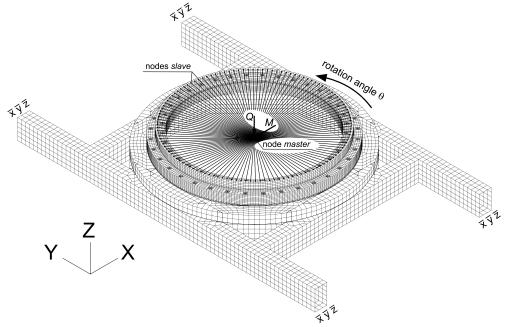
FEM model of the subassembly support and slewing bearing with boundary conditions marked
